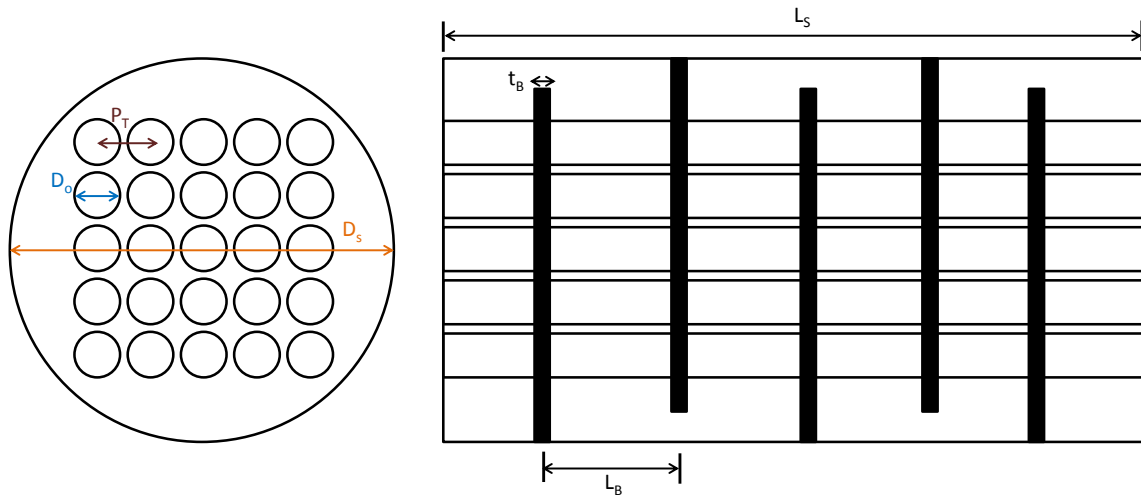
Cross sectional front and side view of shell and tube heat exchanger.
